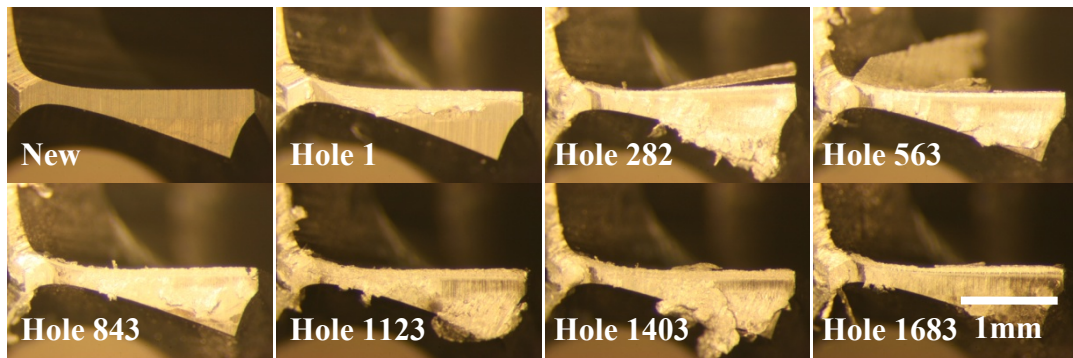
Tool wear micrographs of uncoated carbide drill under 3bar cutting fluid, 260m/min cutting speed (Test 2)
